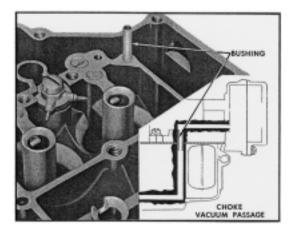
Bushing Installed in Carter 4-Barrel Carburetor
